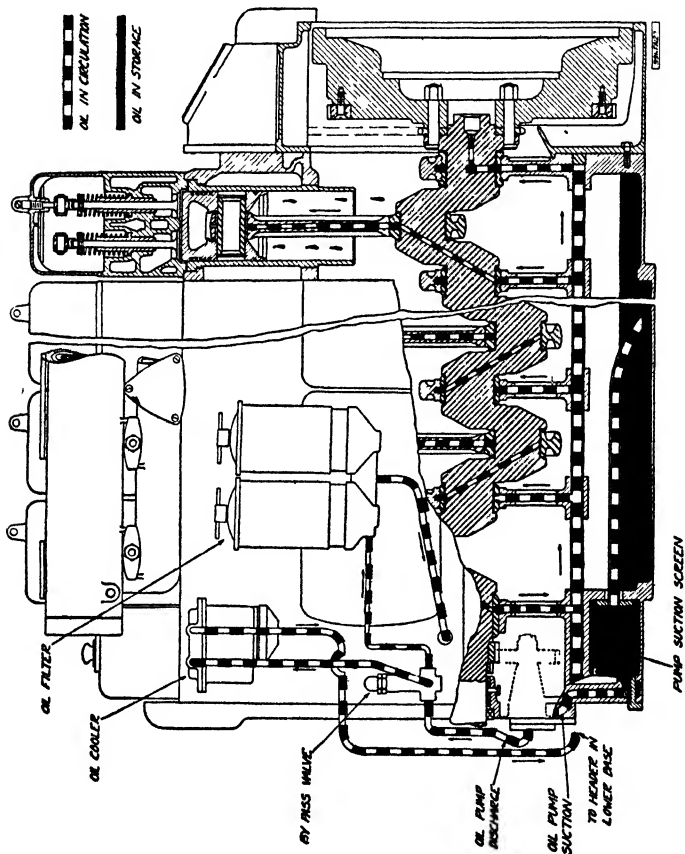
LUBRICATION DIAGRAM OF FAIRBANKS-MORSE MARINE DIESEL ENGINE.
